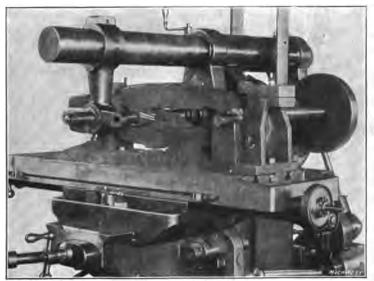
Milling Slot of Crank-shaper Rocker-arm
